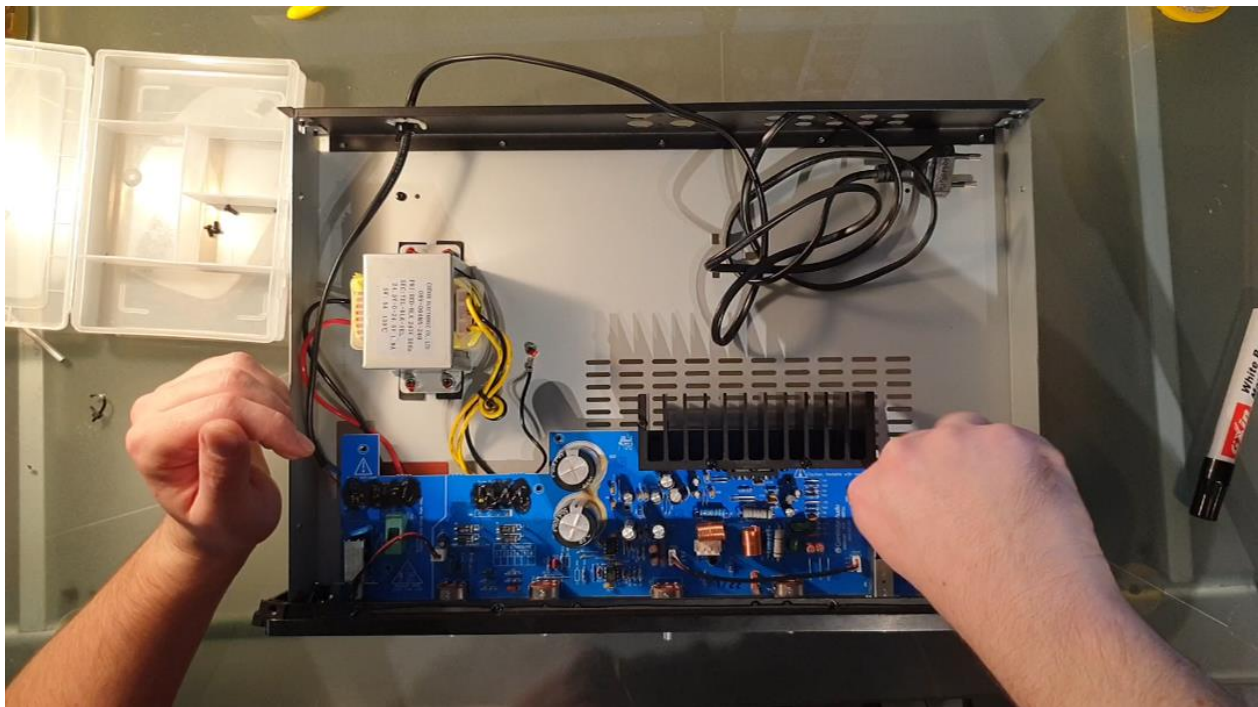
Figure X: Cambridge AM5 disassembly, filmed using a tripod.
